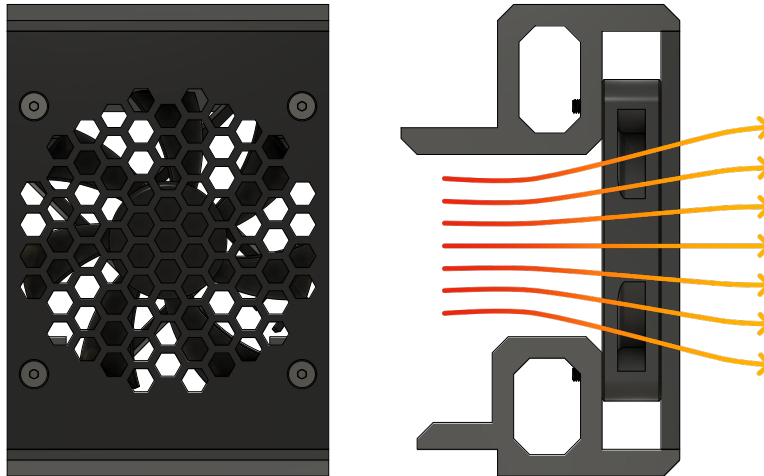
Rear panel subassembly with integrated exhaust fan.
